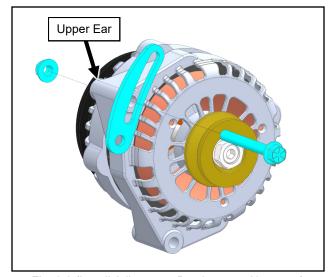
(Install Adjustment Bracket onto Alternator)
